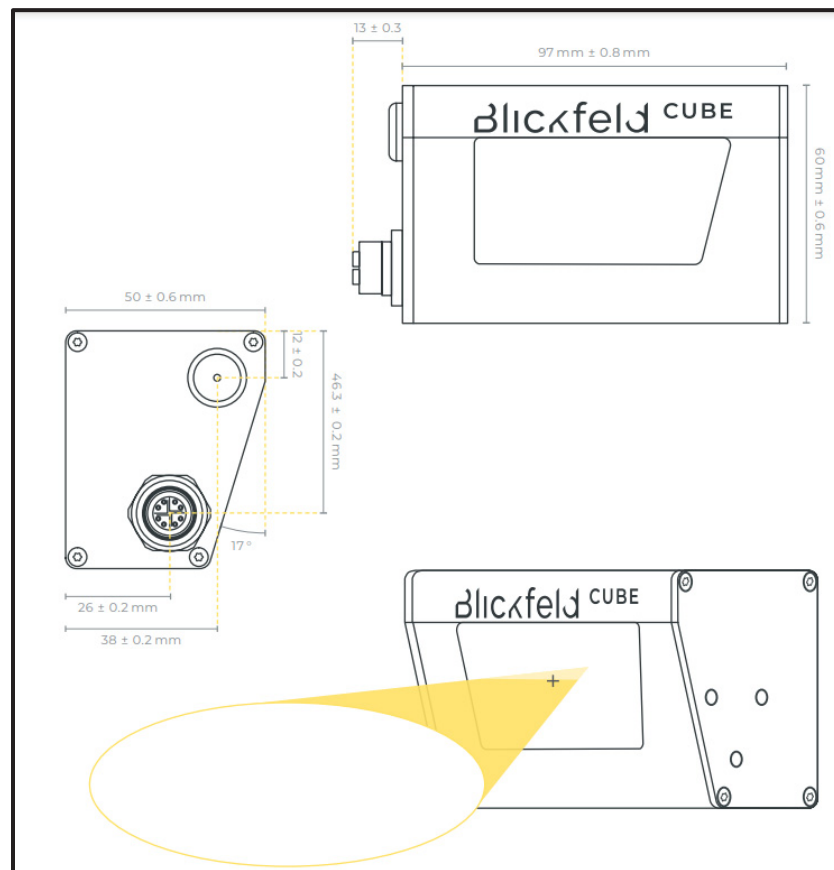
Blickfeld Cube 1 Outdoor Dimensions
